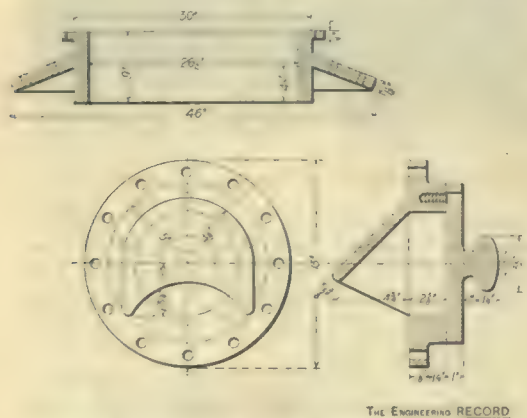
DETAILS OF INSPECTION FLANGE.
